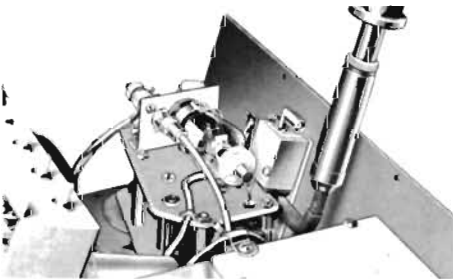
Using a right-angle soldering iron to solder the thermocouple connecting strap in place
